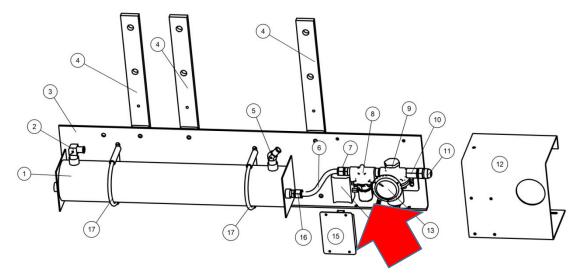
LNG system heat exchanger-solenoid valve assembly. The red arrow identifies the electrical coil that will be replaced.
